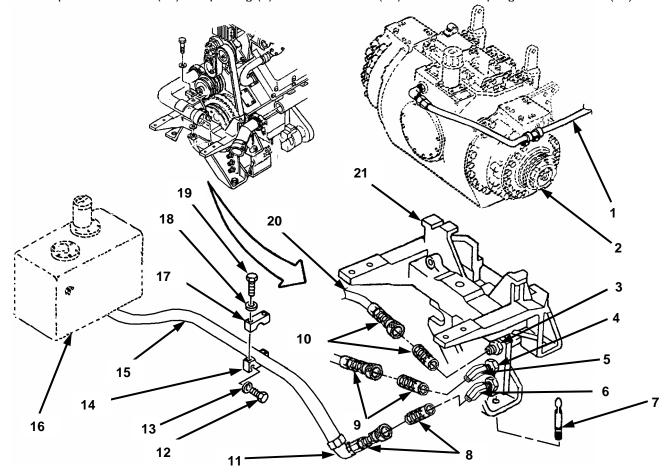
Quick-Disconnects and Guide Pin at Lower Rear Engine Bulkhead
